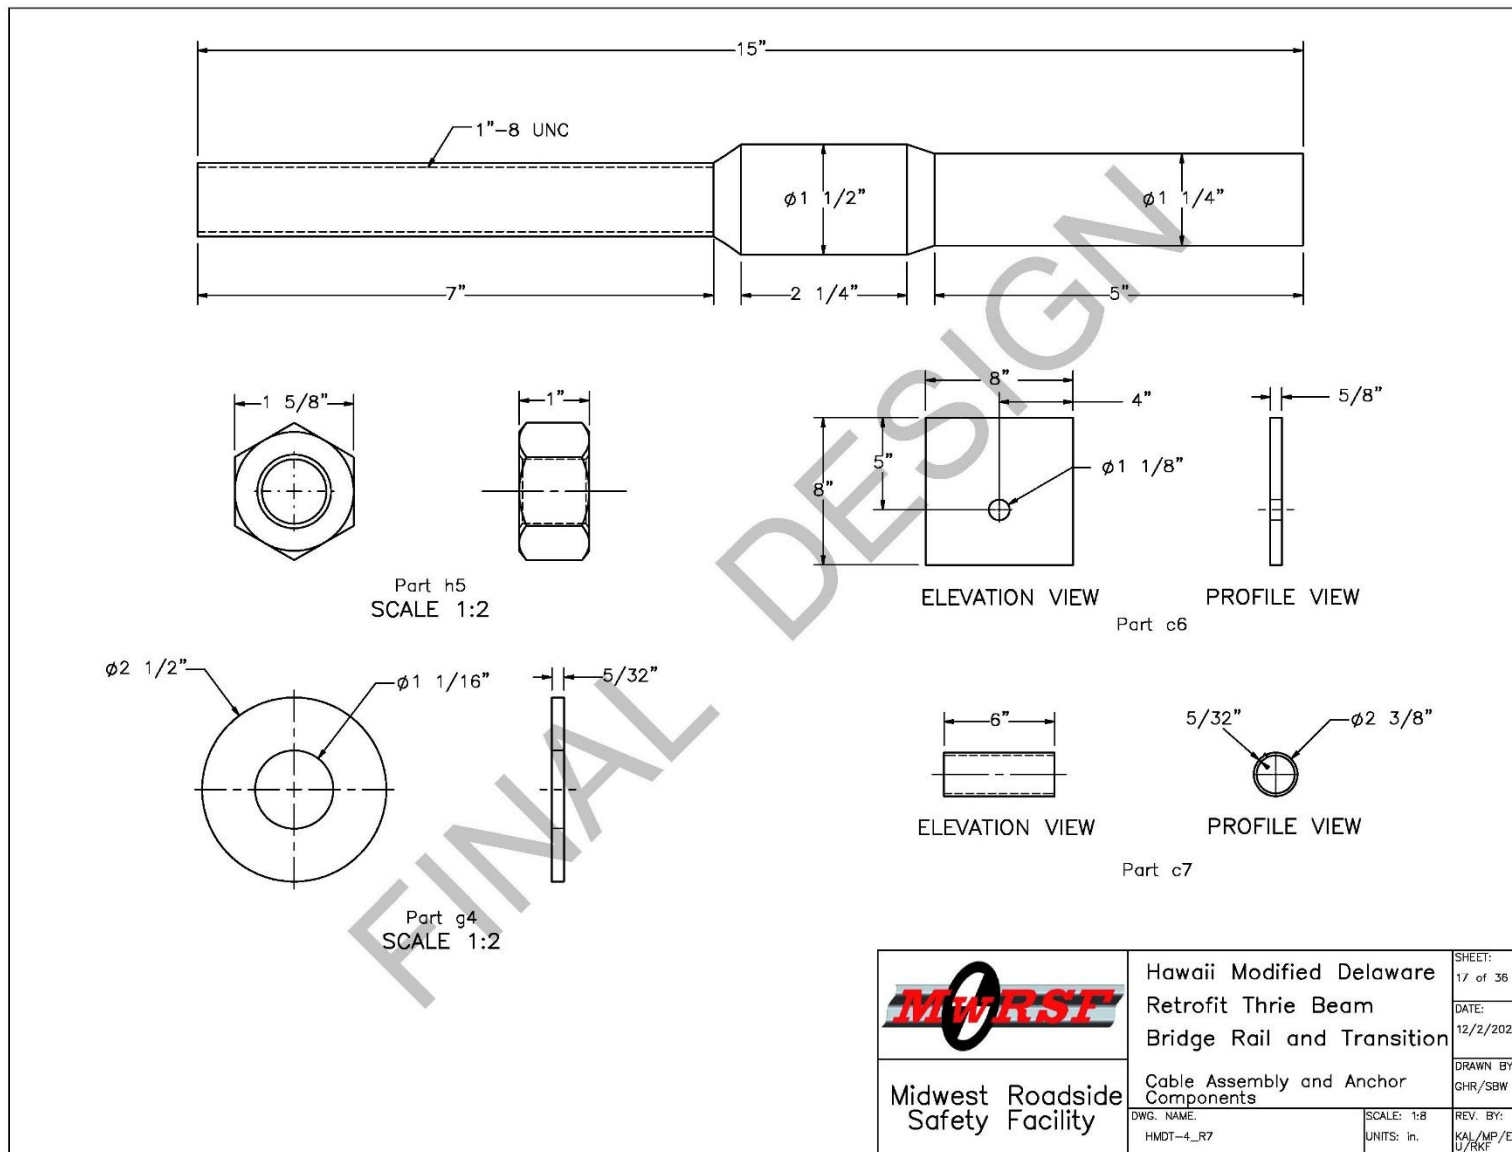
Cable Assembly and Anchor Components, Test No. HMDT-4
